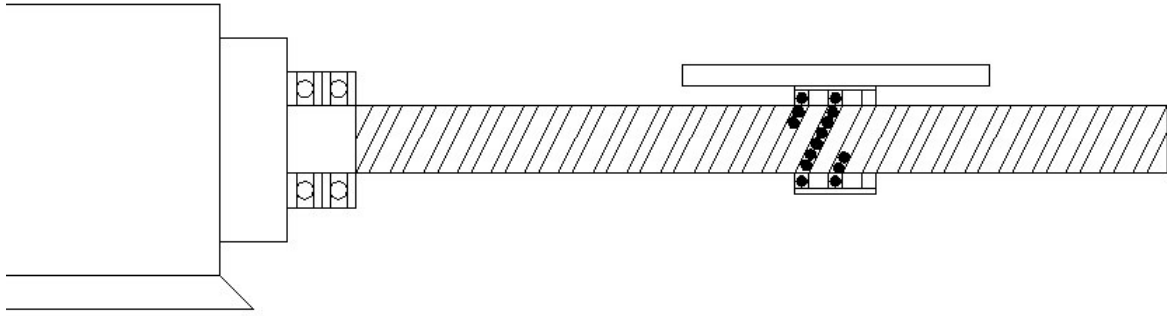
Electric motor joint with a ball screw with a free terminal
